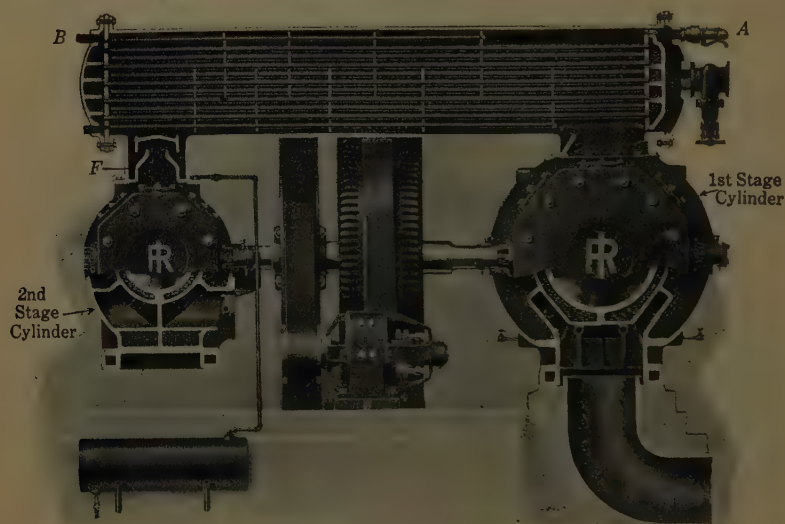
TWO-STAGE MOTOR-DRIVEN AIR COMPRESSOR
